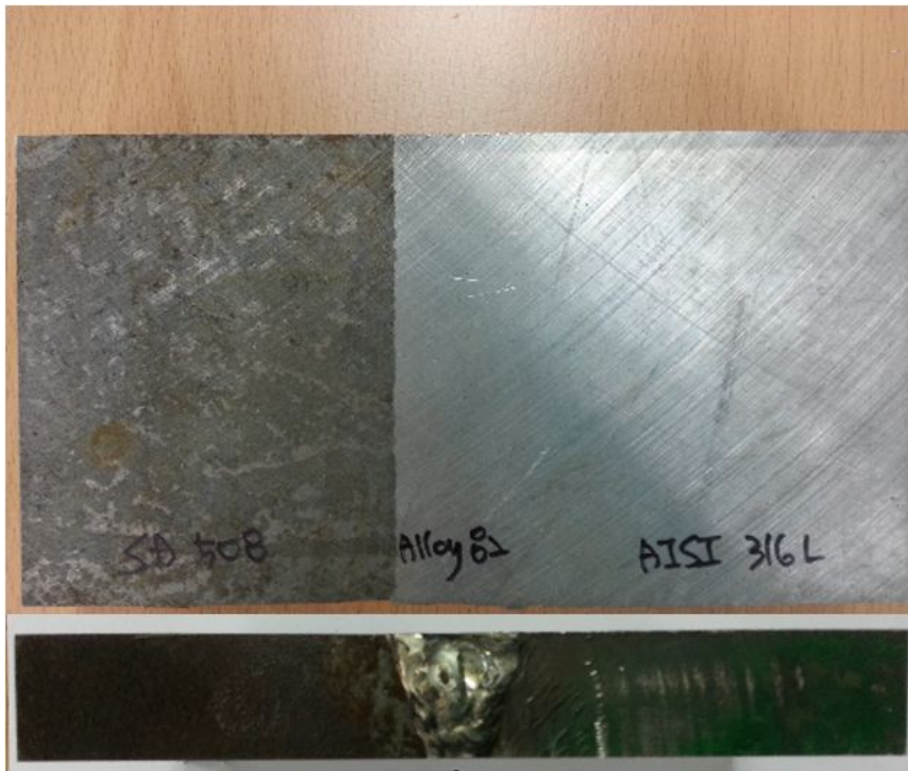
1. Specimen of the dissimilar metal welds used in this study.
